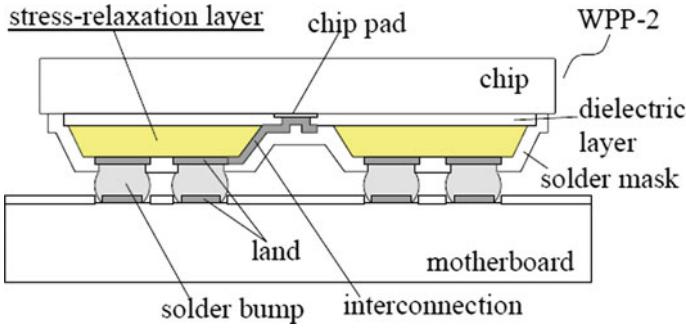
Cross section of Hitachi’s WLCSP mounted on a PCB
